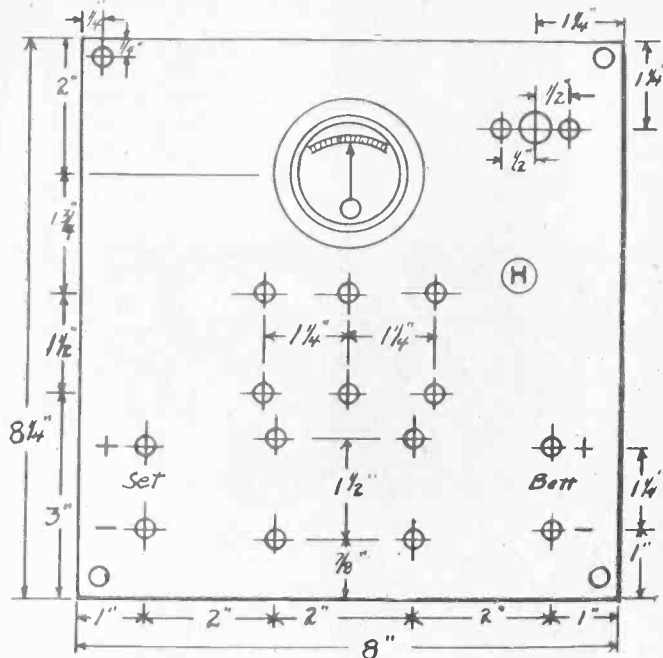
Panel layout for front of battery charger giving dimensions and showing location of holes to be drilled. The size of the binding posts to be used will govern the size of the holes where no measurement is given.
